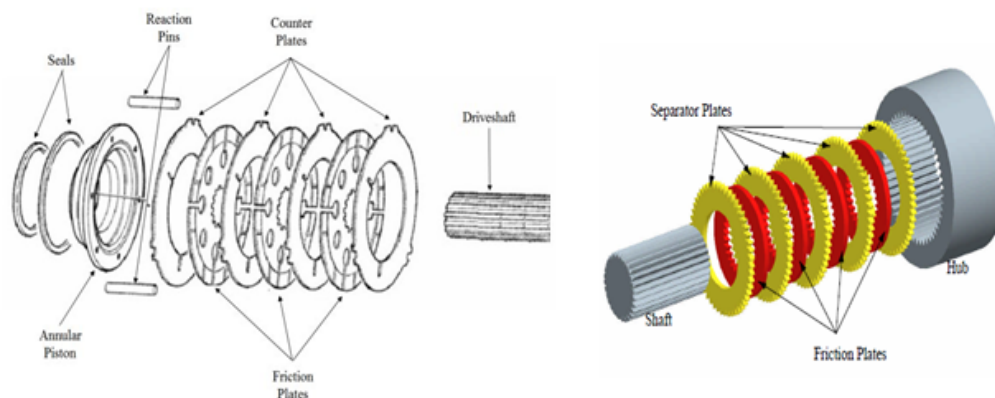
Exploded view of a simple multi-disc brake [10]
